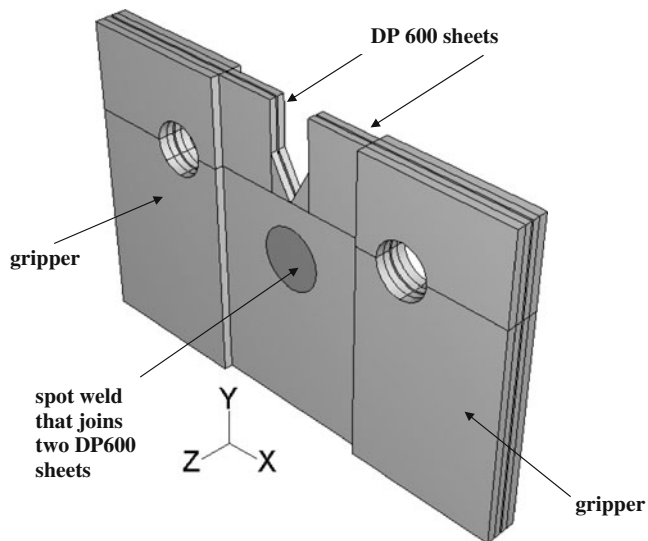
Off-center view of a single weld V-notch specimen in Fig. 1 (b). Spot weld is positioned 1.5 mm beneath the notch tip
